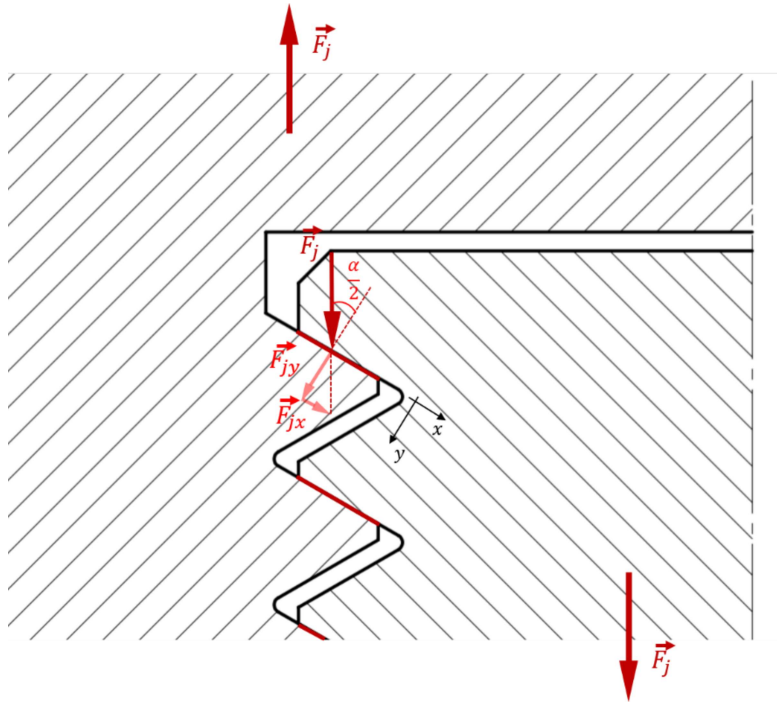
Pressure on the Thread Fillet Surfaces for the Bolted Connection
